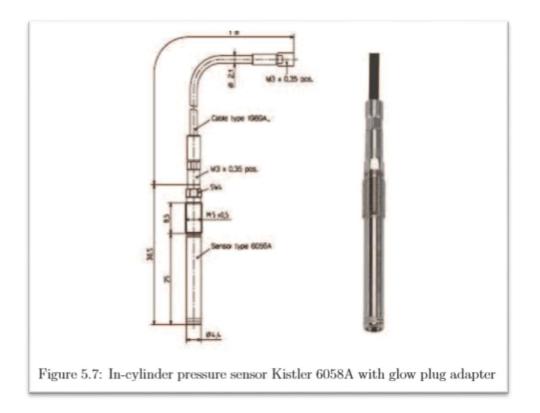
In-cylinder pressure sensor Kistler 6058<sup>ª</sup> with glow plug adapter
